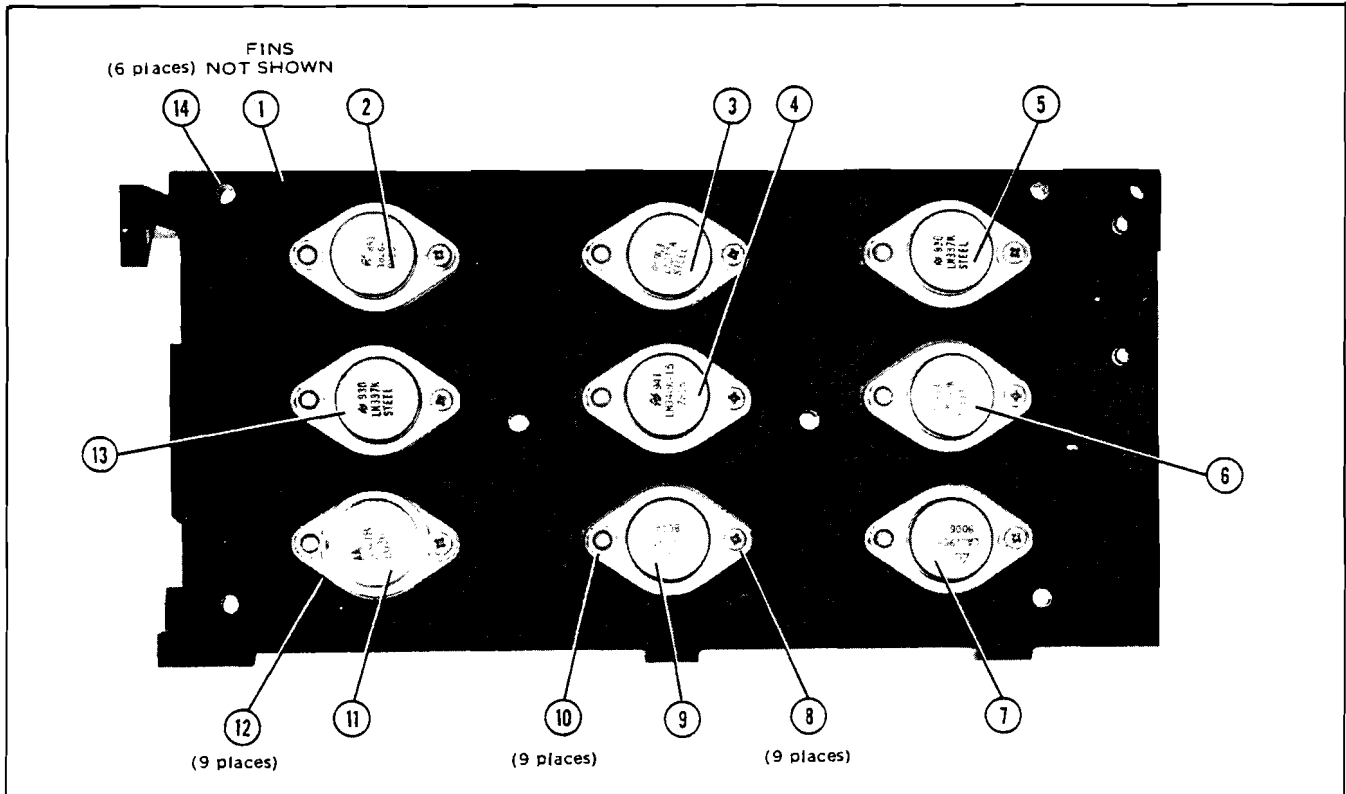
Bottom View, Parts Identification (1 of 2)
